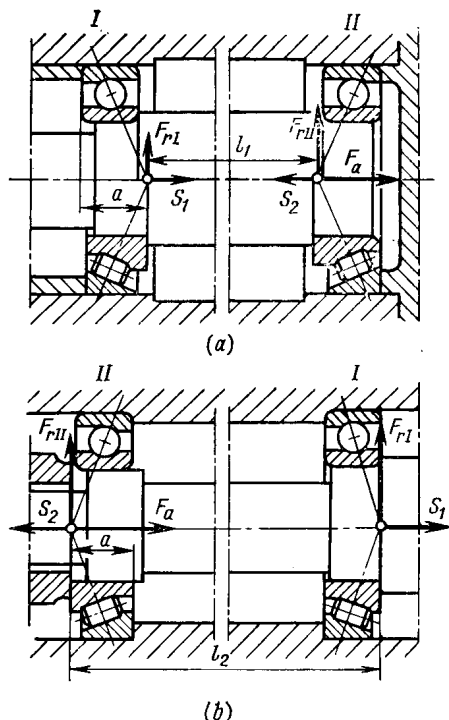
Mounting of angular-contact bearings: with backs directed outwards (a) and inwards (b)
